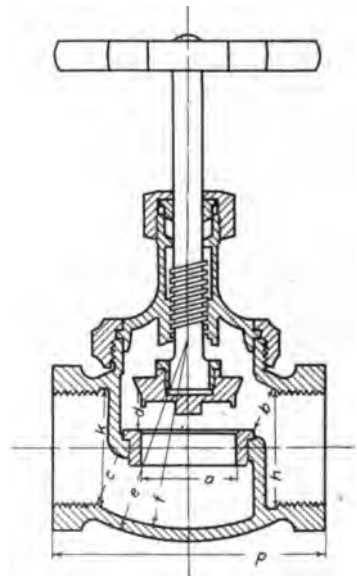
Section Through 2-inch Lunkenheimer Globe Valves Tested. Dimensions Given in Table 2, Page 26.
